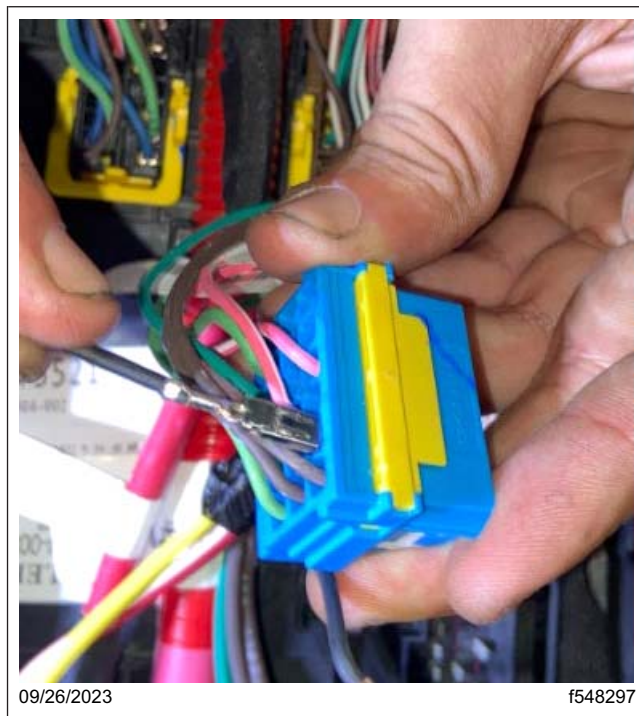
, Inserting the Shorter Black Wire into Cavity 6 of the X2 Connector
